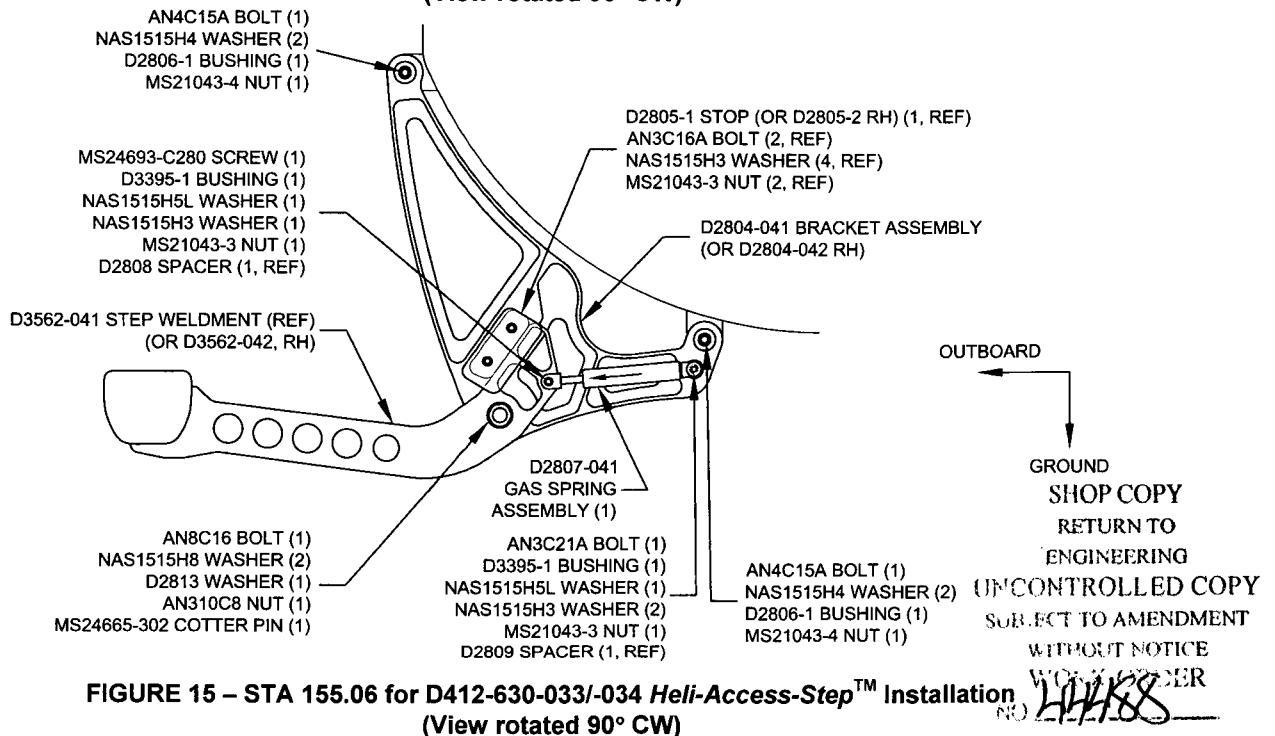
STA 155.06 for D412-630-033/-034 Heli-Access-Step™ Installation
